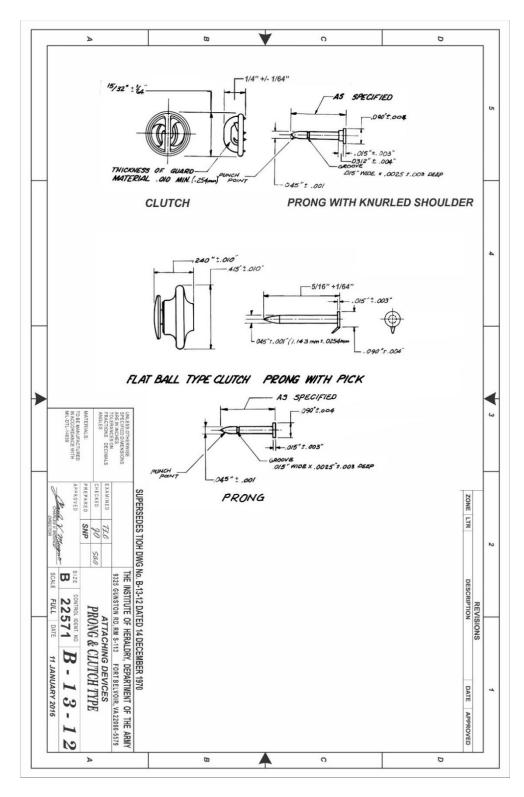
Attaching devices heraldic, prong and clutch type.
